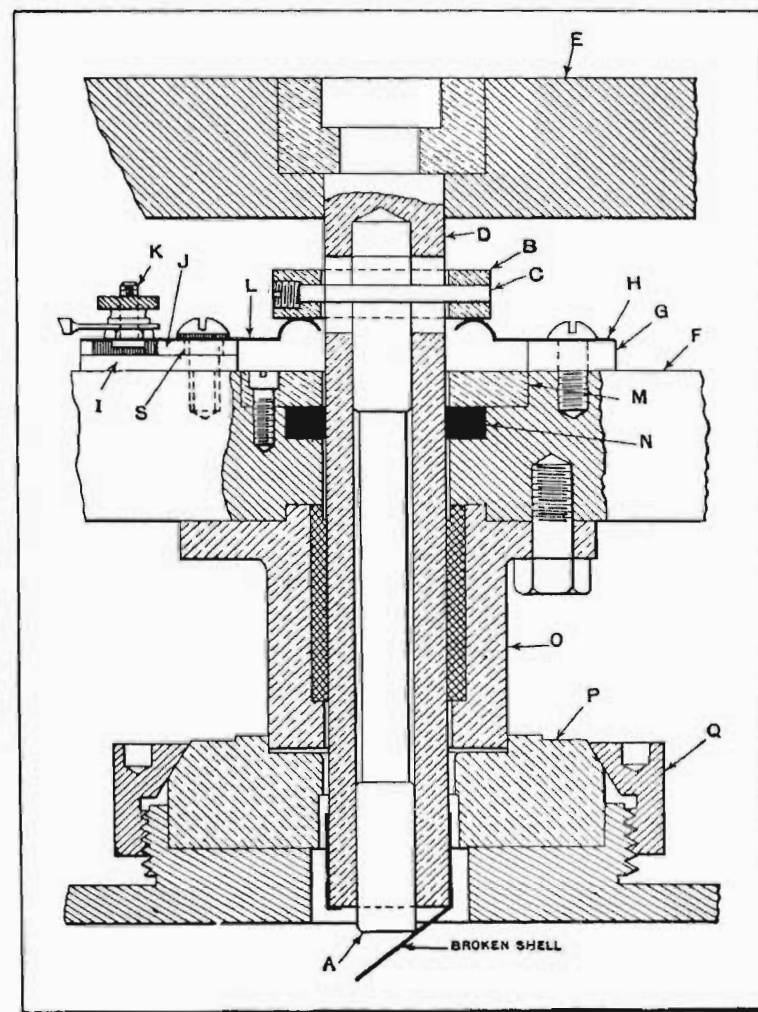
Shell Blanking and Drawing Die Equipped with Electric Stop
